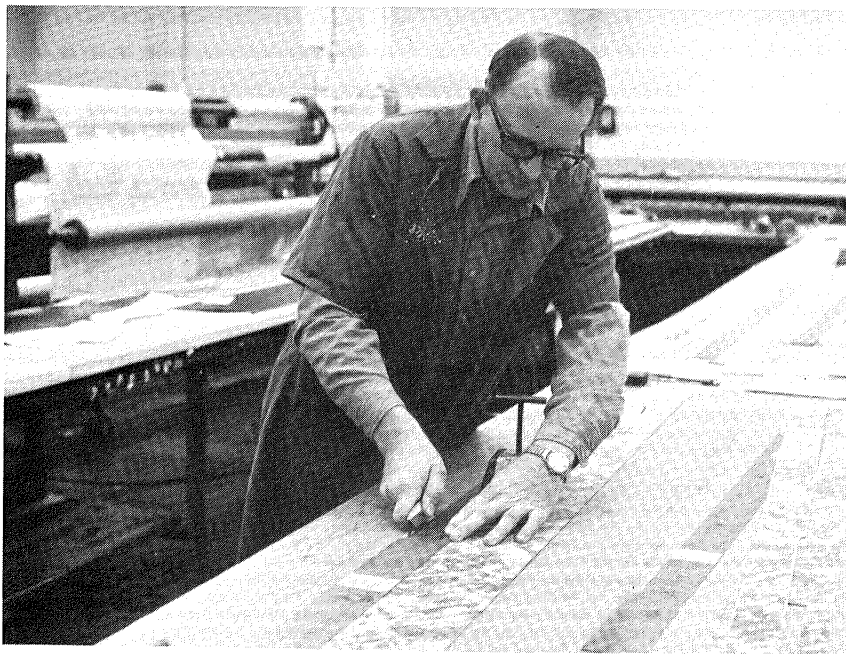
Cutting Elements to be Used in Spar Assembly from Wide Laminate
